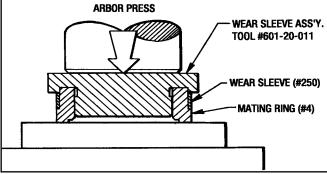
Installing Wear Sleeve (#250) on Mating Ring (#4)
